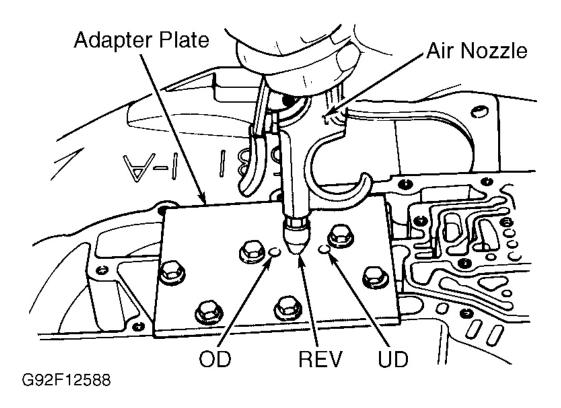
Applying Air Pressure To Clutch Packs Courtesy of CHRYSLER CORP.
